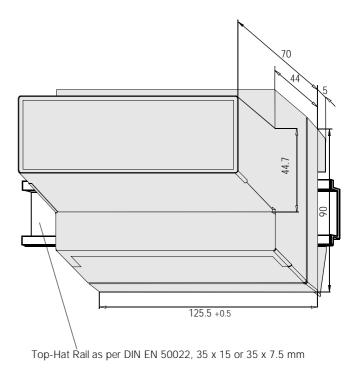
Dimensional Drawing for Top-Hat Rail Mounting (front and side views)
